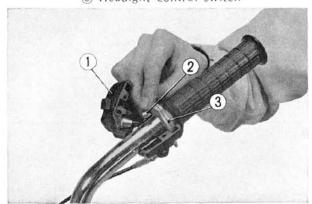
① Starter lighting ignition switch assembly ② Throttle cable
